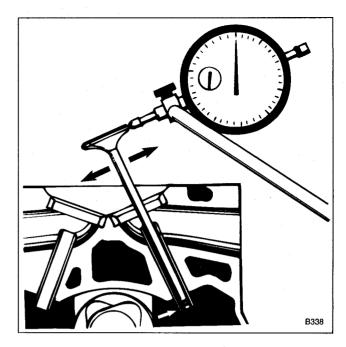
Valve guide wear being checked with dial indicator. Insert new valve until stem end is flush with end of guide (white arrow). See Table c for wear limits.
